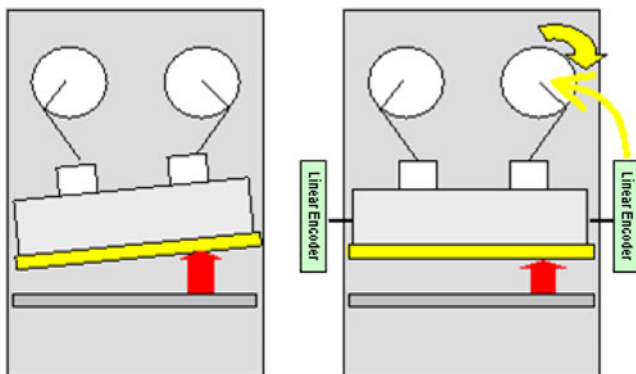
Method of adjusting the slide with multi-axis servo system [6]
